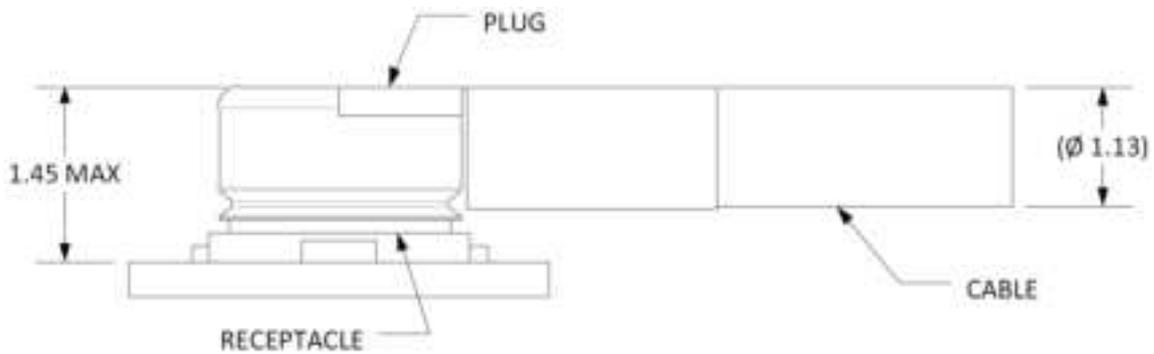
Dimensions of Mated Plugs (Ø0.81/Ø1.13 mm Coaxial Cables)
